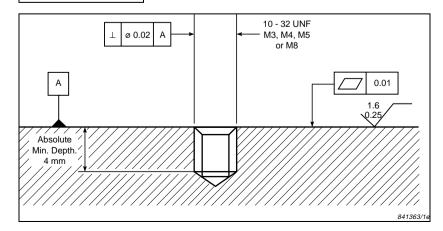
Recommended tolerances for the mounting surfaces. Dimensions and symbols in accordance with ISO 1101 This mounting method is used in obtaining the specifications of all the accelerometers with the following exceptions:
